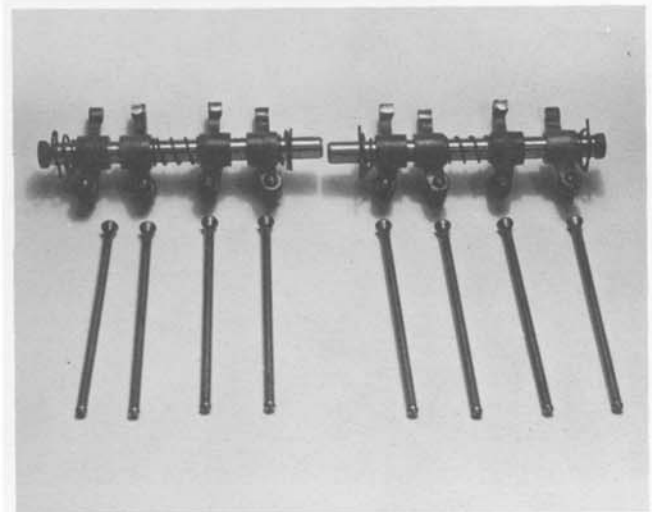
ROCKER ARM AND PUSHROD ASSEMBLIES
